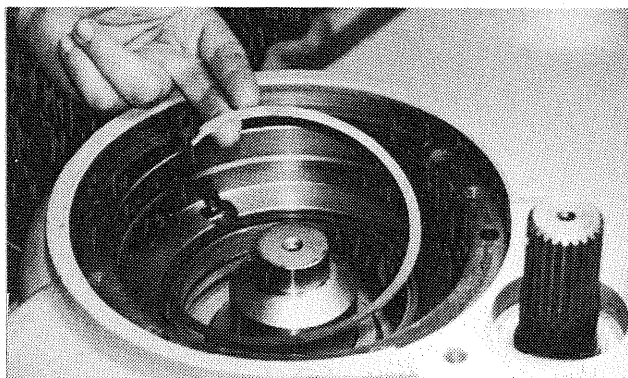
Front Cover and Brake Removal (1 of 2)
